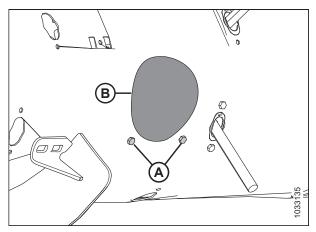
Auger Access Hole Cover – Solid Finger Shown, Hollow Finger is Similar
